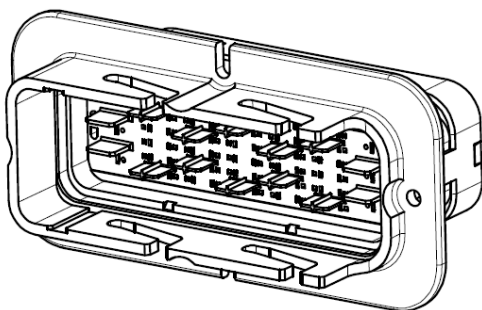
SRC 60+6 Mixed Power Blade Assembly Housing Mating Interface
